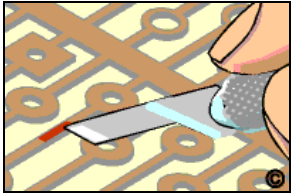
Scrape off the bonding film from solder joint area on the back side.
